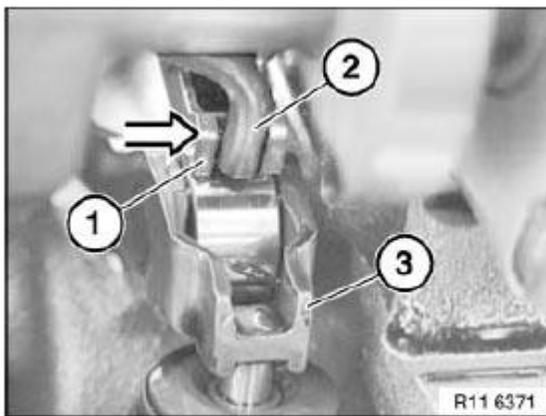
Inserting Torsion Spring On Intermediate Lever
